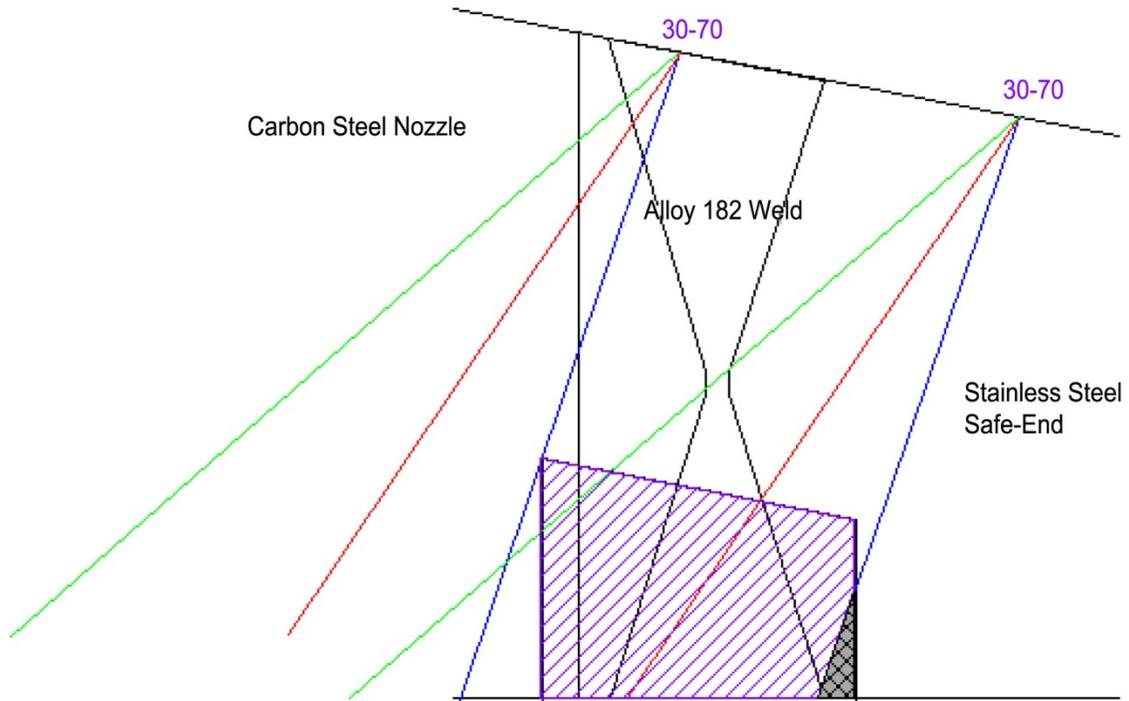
Steam Generator Hot Leg Nozzle Weld Axial Scan CRV Coverage Assessment
